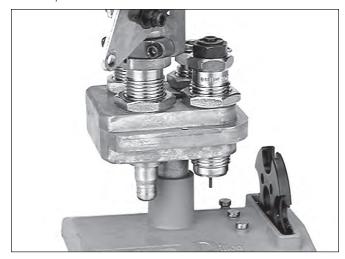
A complete, removable toolhead with all of the dies adjusted. Toolhead stand optional.
